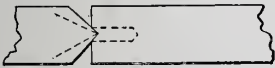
Properly-Arranged Mandrel and Dead Center.
